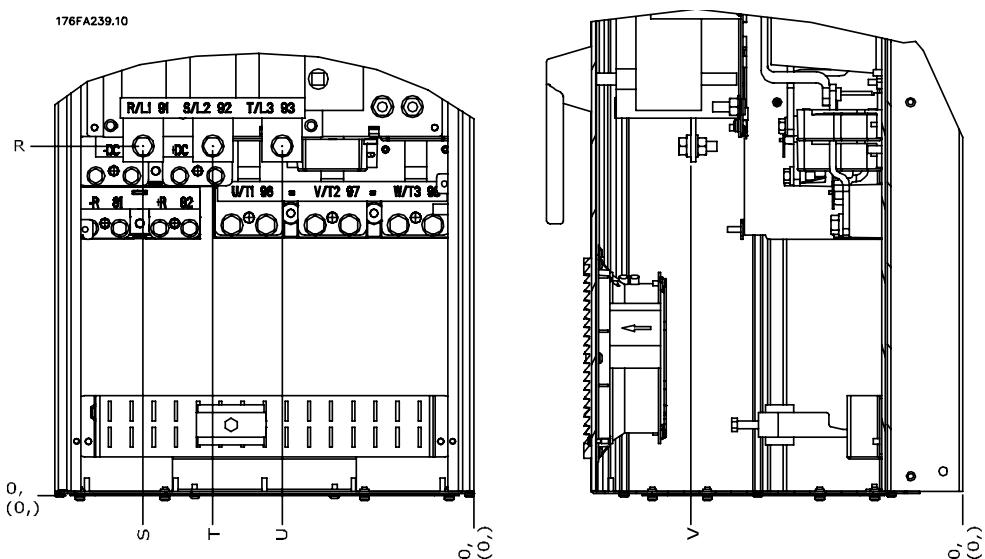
Position of power connections with disconnect switch, frame size D1 and D2
